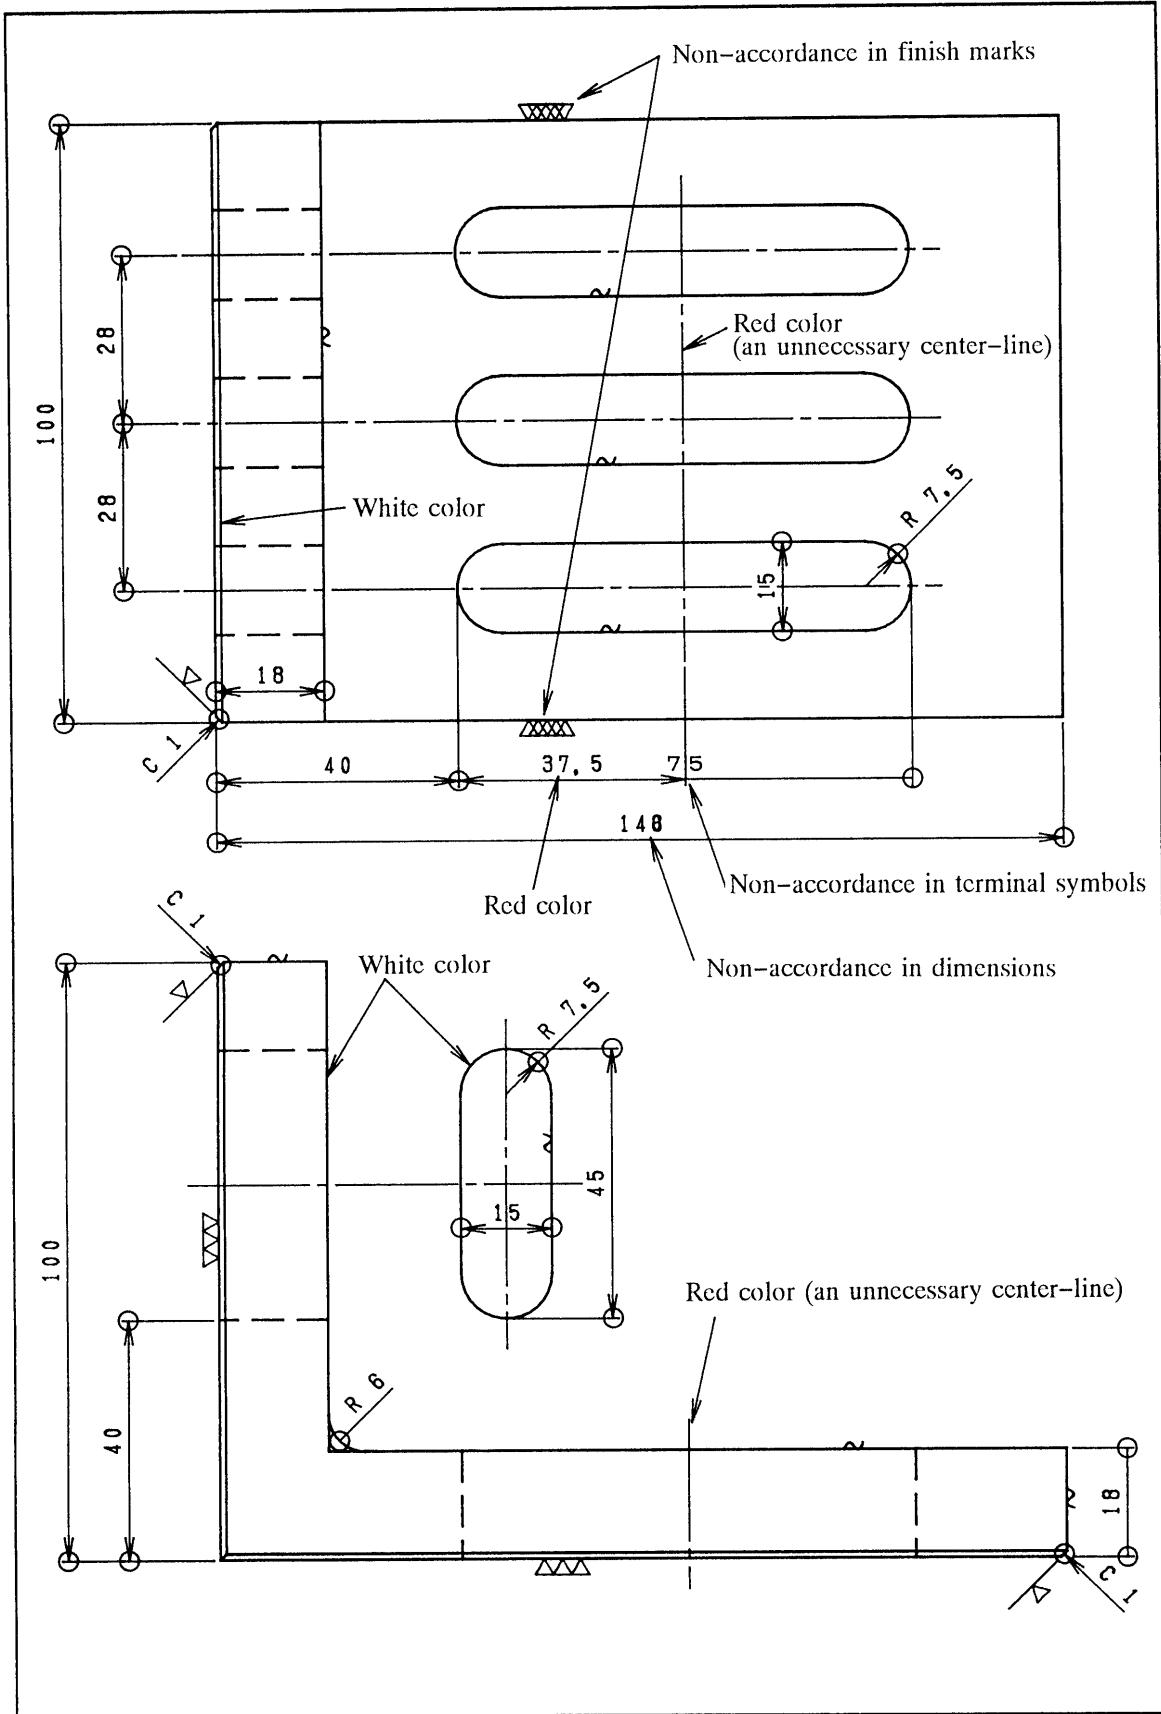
An example of perfectly overlapped drawings of a machine element of an angle-plate by shifting the partial model drawing to the right (Plane and front views of drawings to be checked: top, those of model drawings whose partial front view is shifted to the right: bottom)
